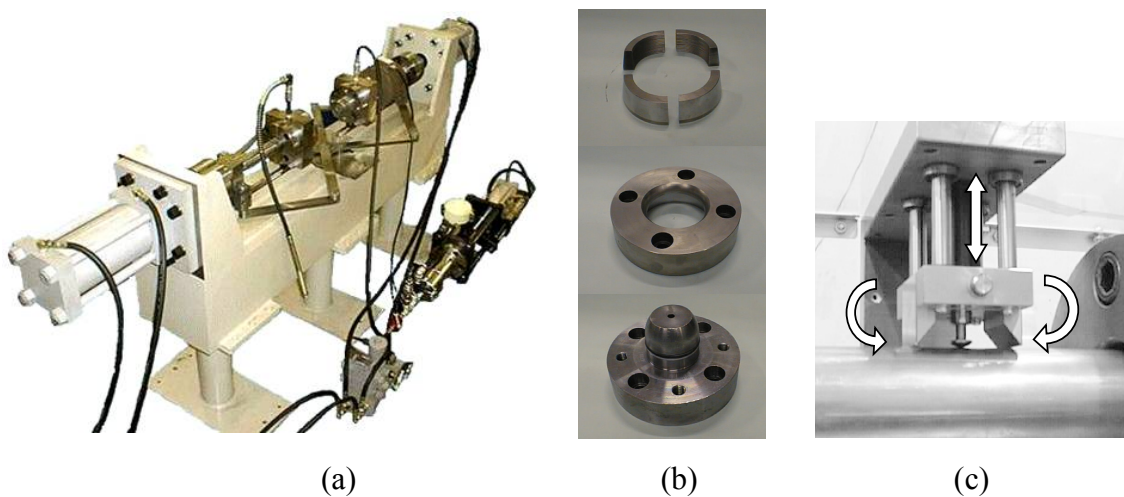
The Biaxial bulge test machine, (a) Over view, (b) apparatus of chucking system, (c) Measurement system of Axial direction curvature.
